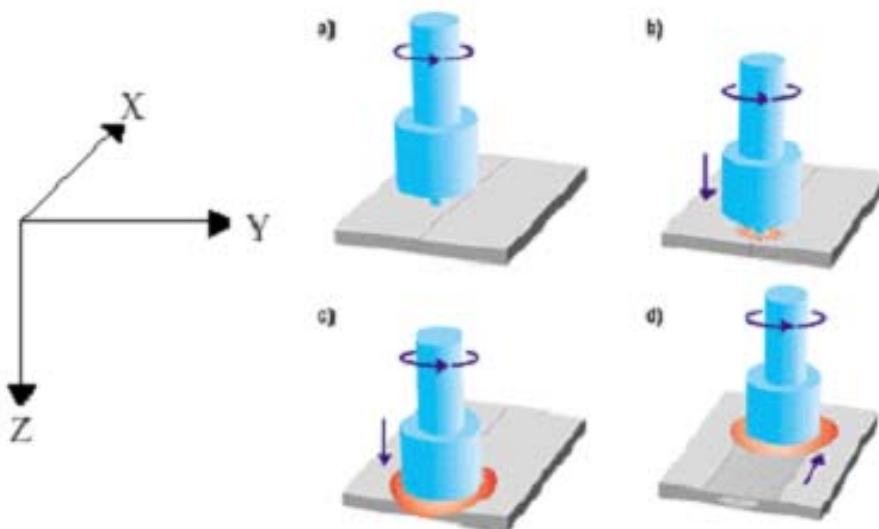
Schematic of FSW process sequence. (a) Rotating tool above joint; (b) Rotating tool lowered onto joint line; (c) Z-axis load drives rotating pin into the joint creating frictional heat; (d) X-axis load is applied causing the rotating tool to traverse along the joint line.
